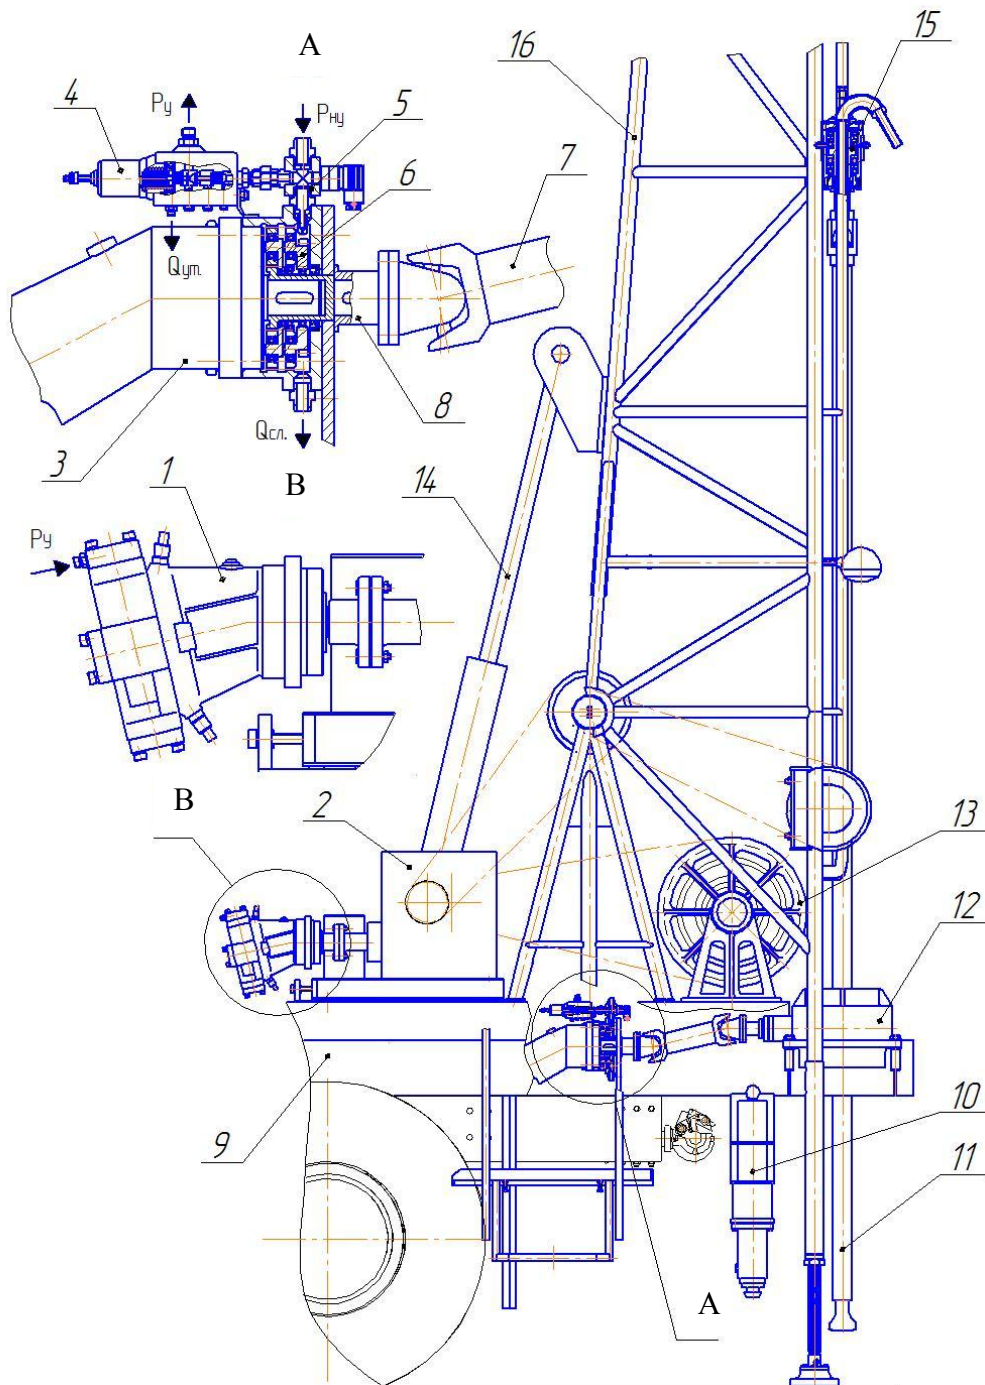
MDM general view: 1 is adjustable hydraulic motor; 2 is tool feed drive; 3 is uncontrolled hydraulic motor; 4 is HOV valve; 5 is HMS sensor; 6 is gearbox; 7 is driveshaft; 8 is coupling; 9 is auto chassis; 10 is system of outriggers; 11 is tool; 12 is main motion drive; 13 is double drum winch; 14 is hydraulic cylinder of mast lifting (lowering); 15 is swivel; 16 is mast.
